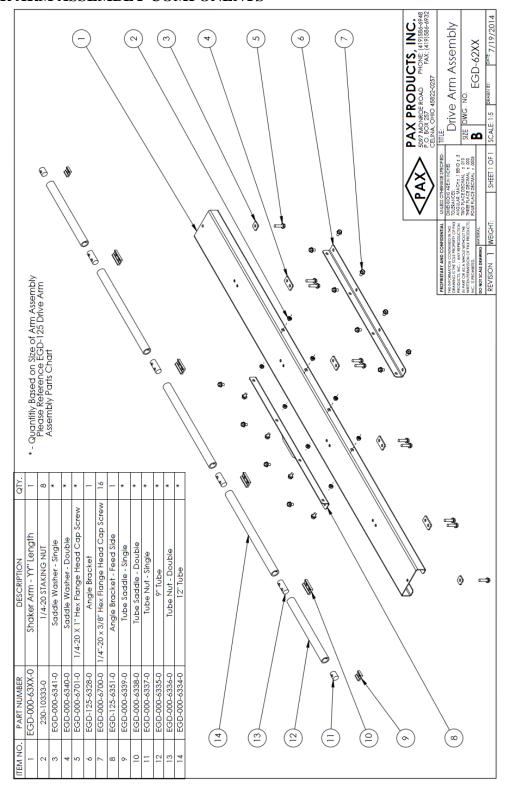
EGD-000-62XX-X EGD-125 GENERIC SHAKER ARM ASSEMBLY
